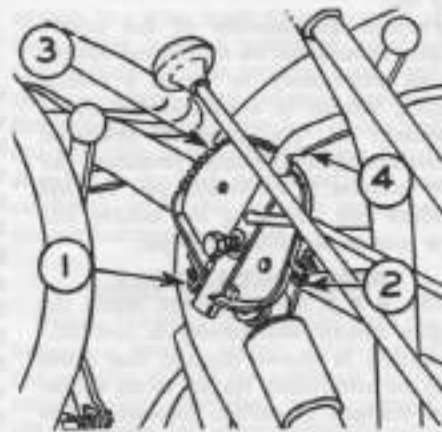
Massey-Harris Diesel engine hand throttle.
